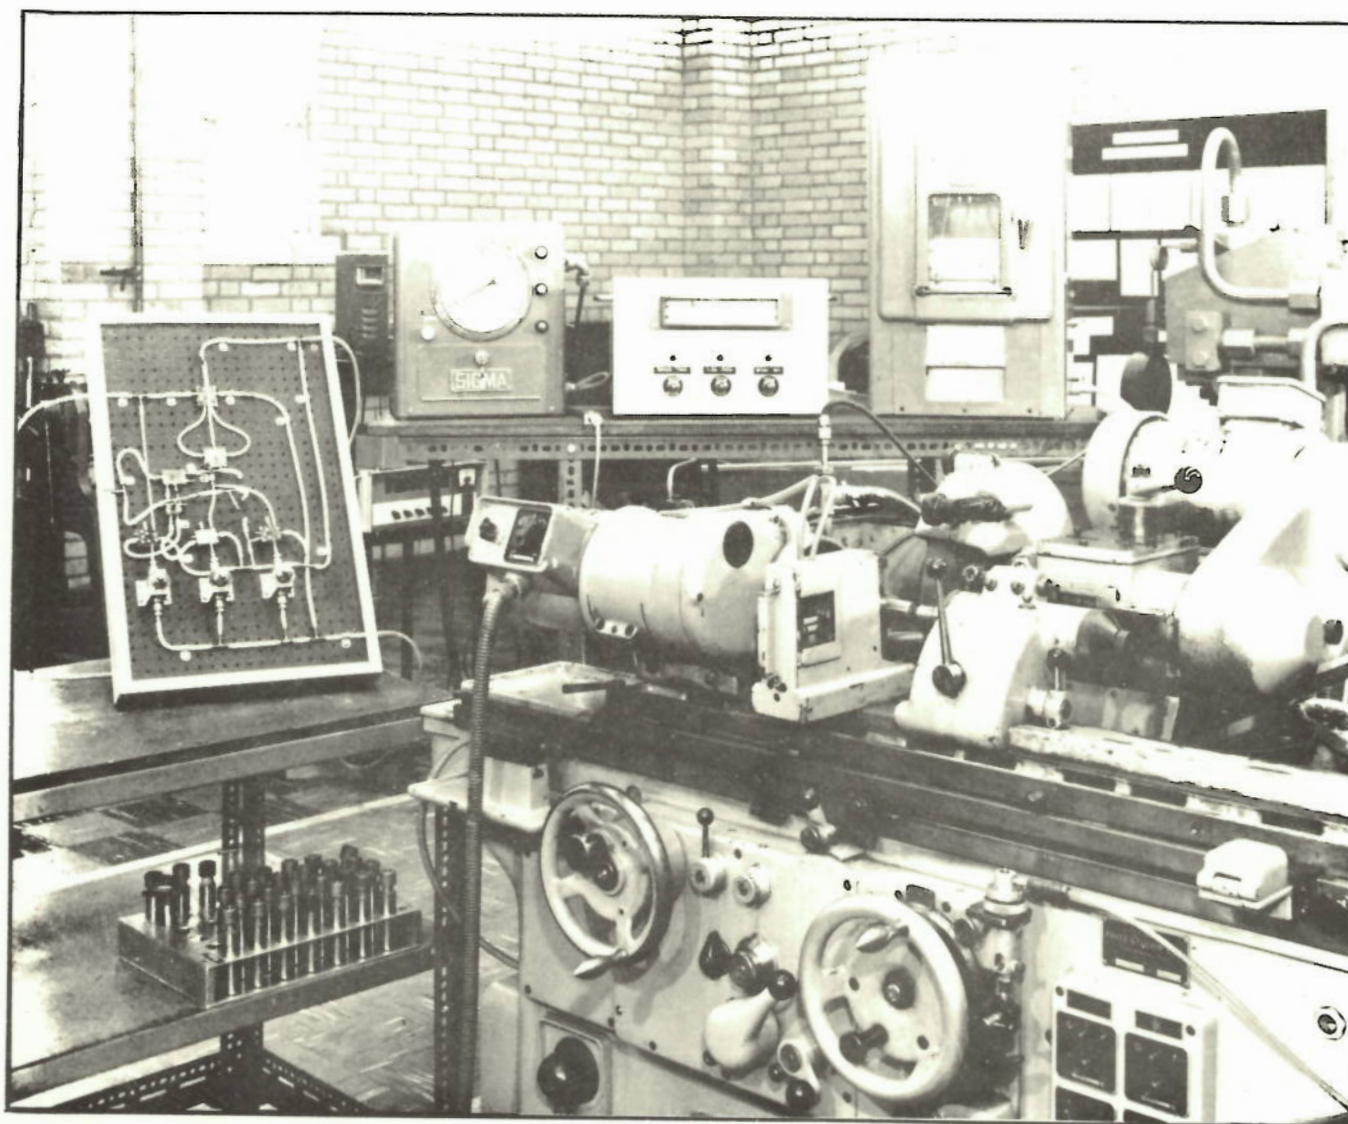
Precision Grinding machine and control equipment. The units mounted at the rear of the machine are, from left to right, the wall attachment, electro-pneumatic and ball valve control systems, and the specimen size recorder.
